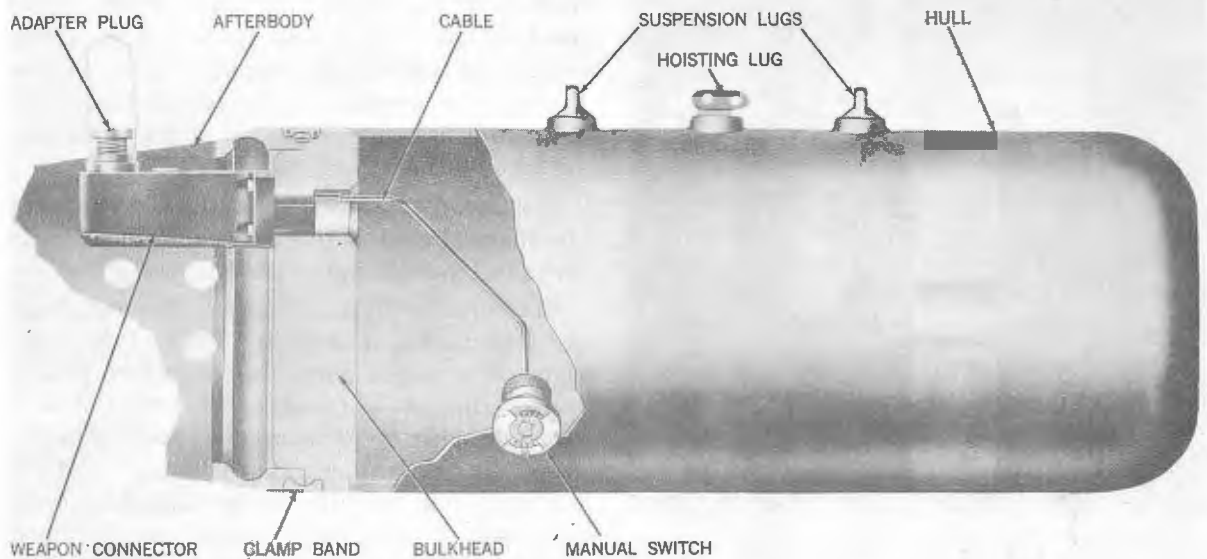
Cutaway of Assembled Practice Bomb.
